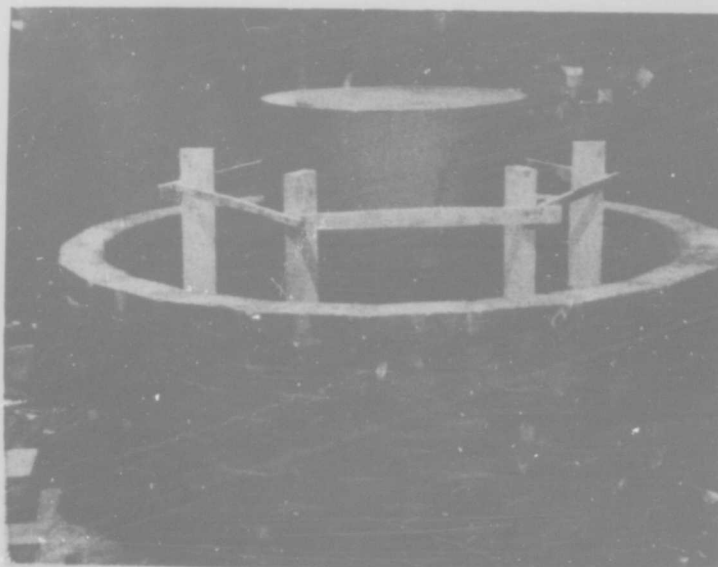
Placement of Wooden 2 x 4's Around the Bottom Ram Train to Support RVA Mold.
